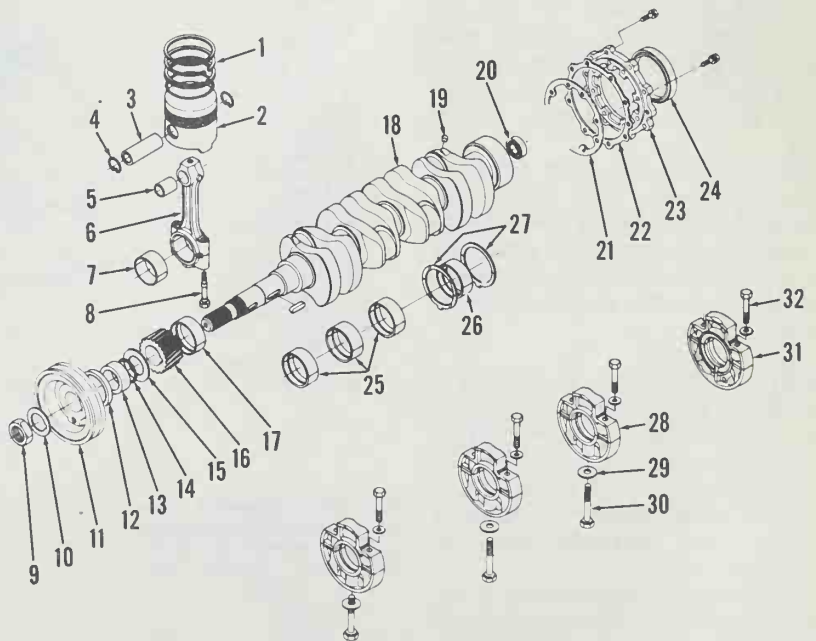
Exploded view of piston, rod and crankshaft assembly. Lower section of bearing carrier (28) on Model S2200-B are retained by side screws as well as screw (30).
